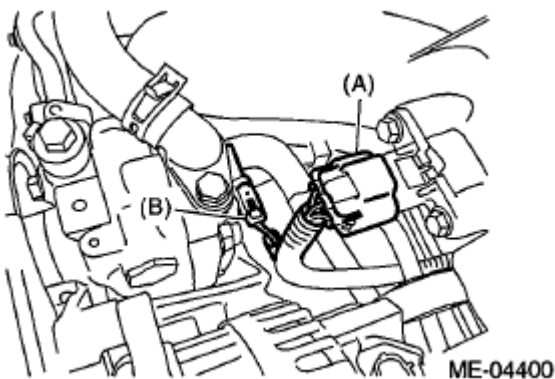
Identifying Manifold Absolute Pressure And Power Steering Pump Connector
